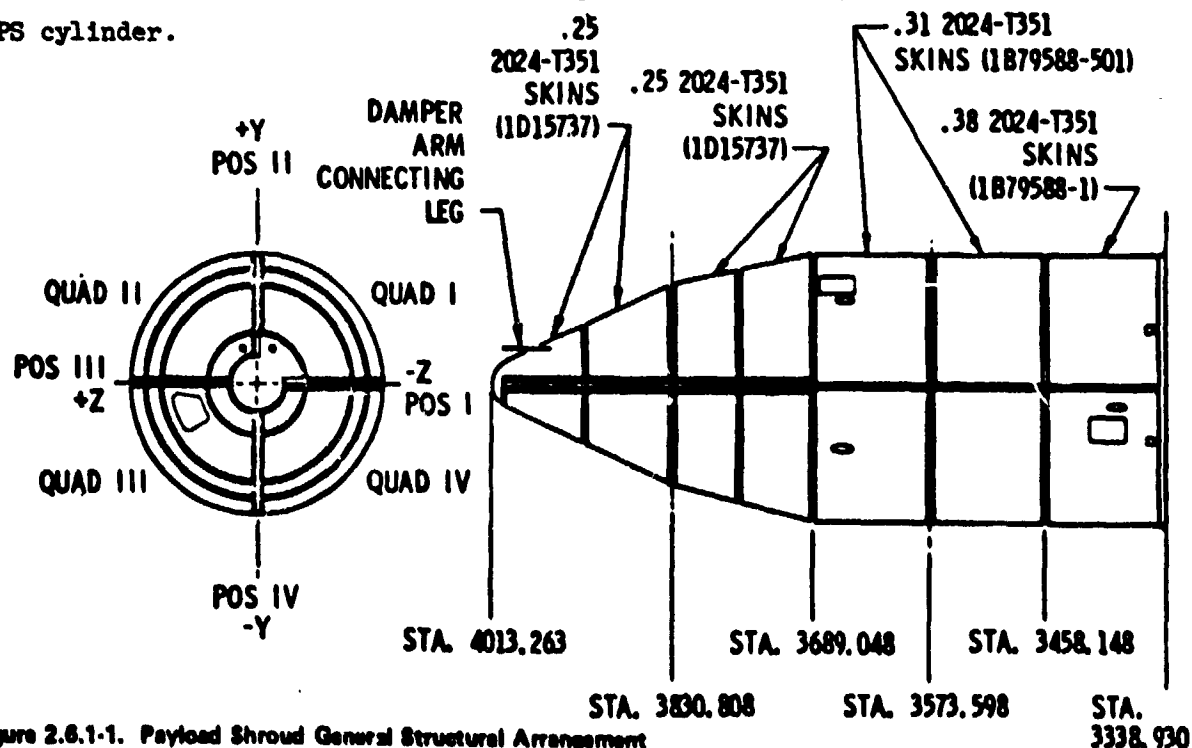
Payload Shroud General Structural Arrangement
